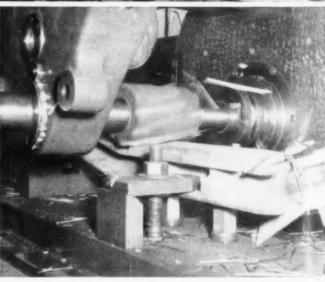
(upper right) Roughing 24 ST forged L-section on a vertical mill with a 2-inch diameter 4-flute helical carbide cutter. Depth of cut is 1½ by 2 inches, feed 22 ipm at 1250 rpm and finish above 100 rms.
